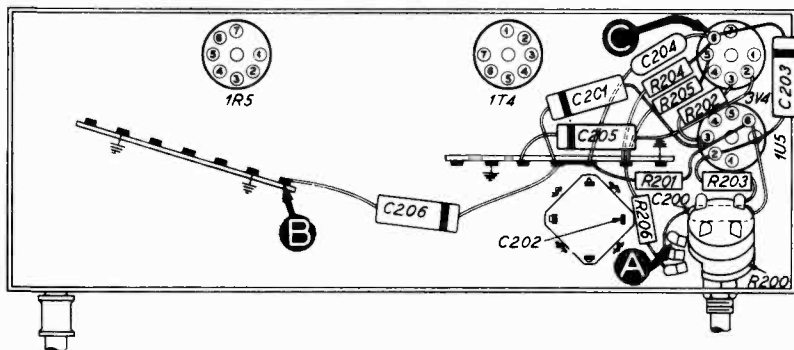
Bottom View, Showing Section 2 Test Points TP-5355B-1
